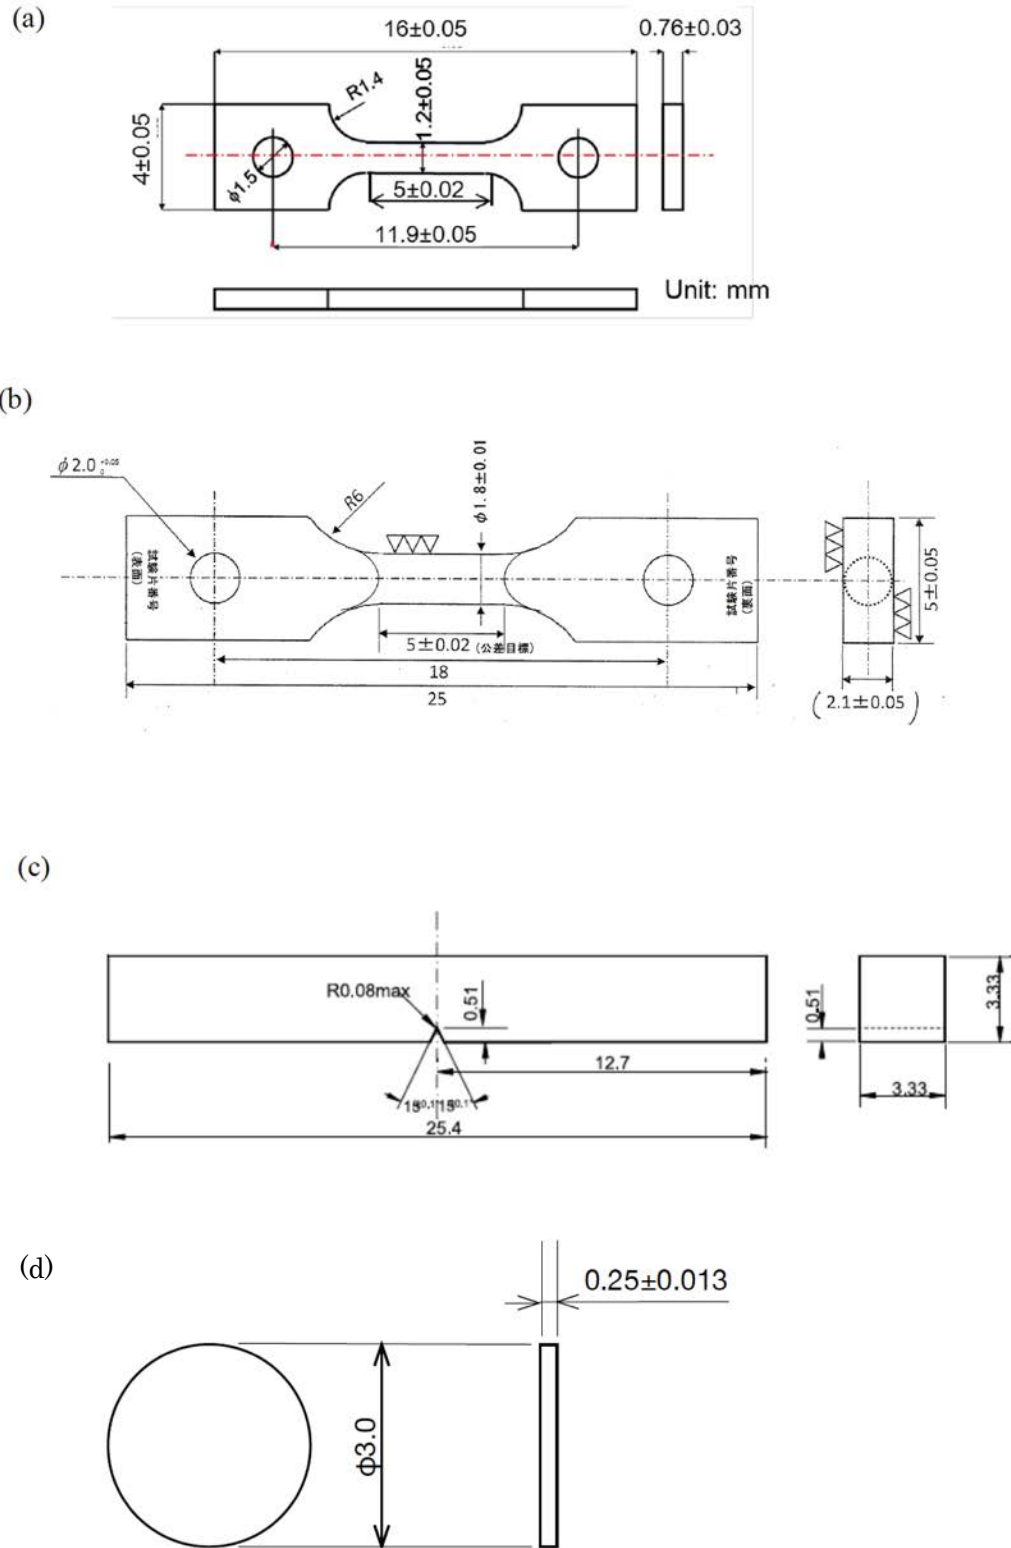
Drawings of (a) SS-J3 tensile, (b) fatigue, (c) 1/3 size Charpy and (d) SP specimen.
